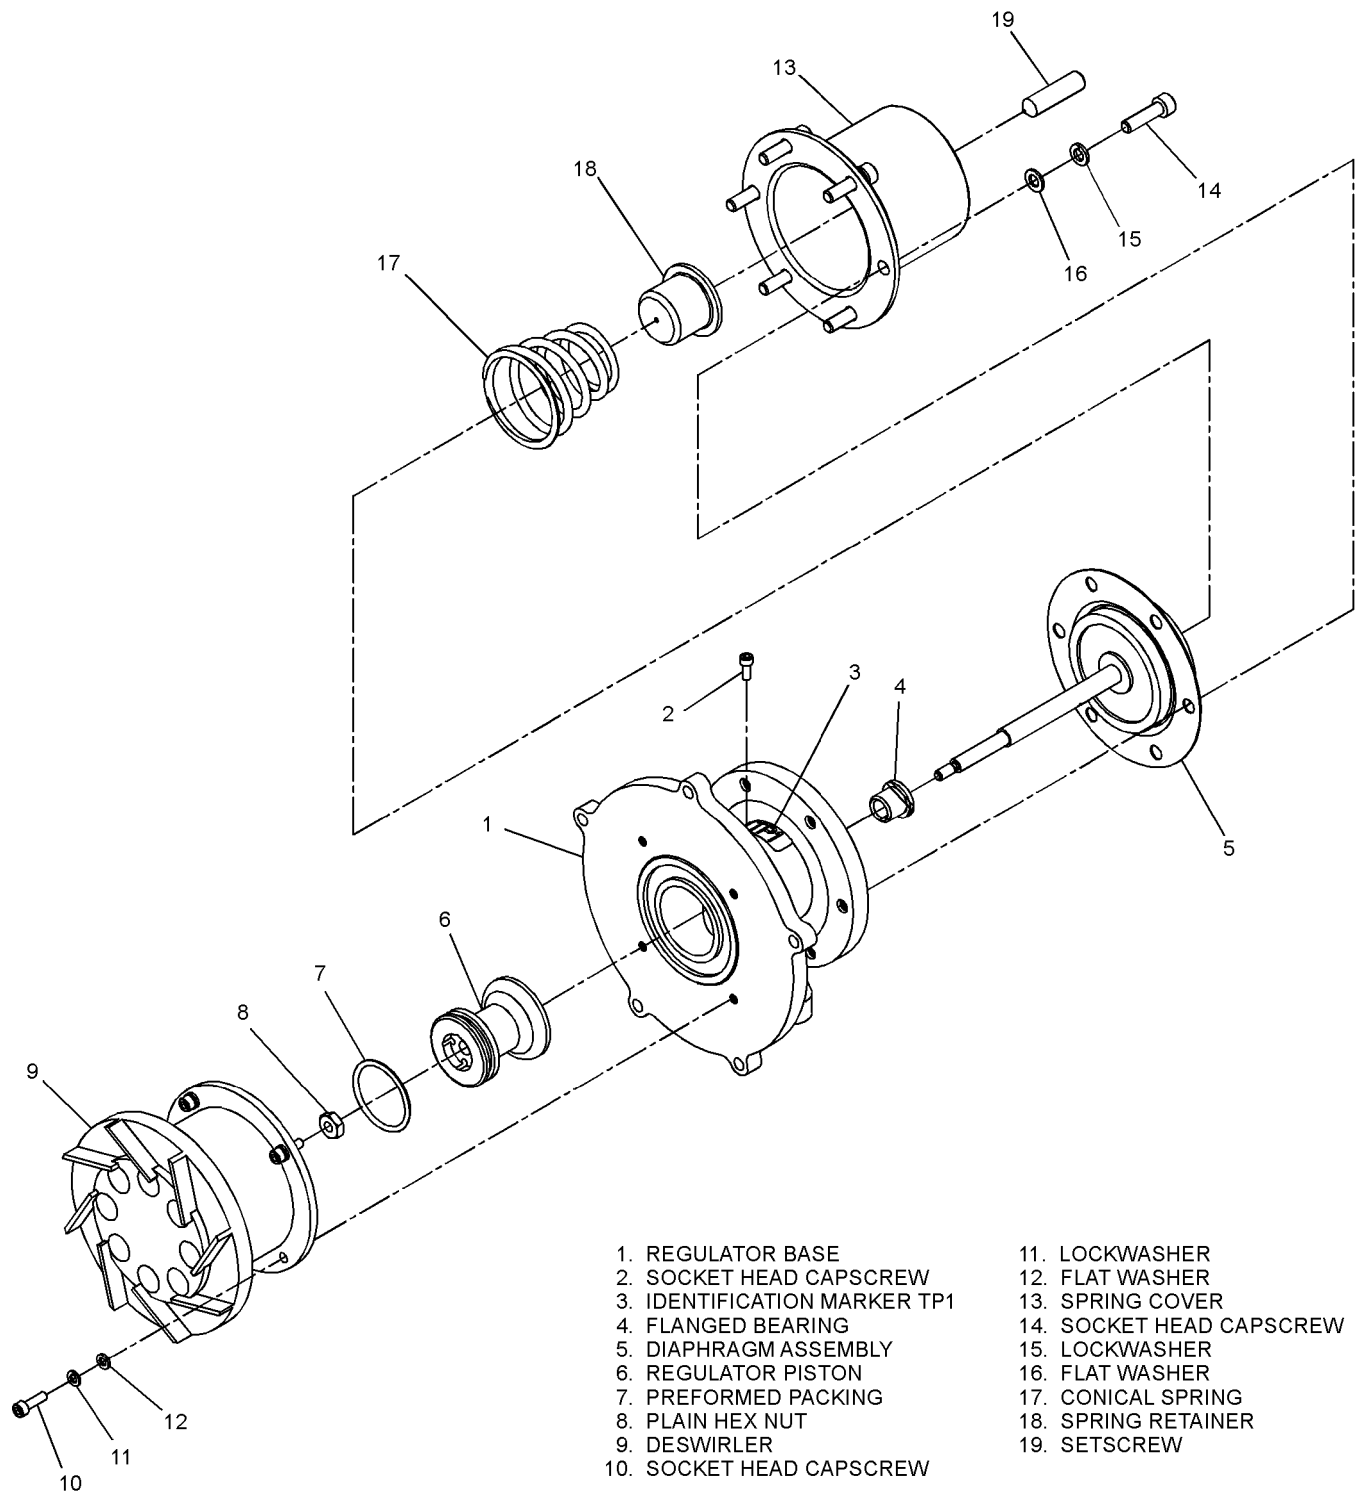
Reducer Assembly, P/N 1653696-1 Removal/Assembly
